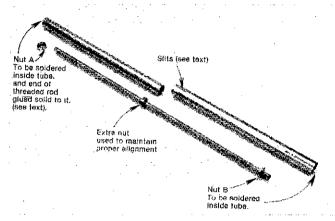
Grind off the corners of the three nuts used in this assembly. Use the threaded rod to align and hold the nuts in place for soldering. After the two end nuts are soldered, remove rod and discard center nut. Glue and assemble as described in the text.
